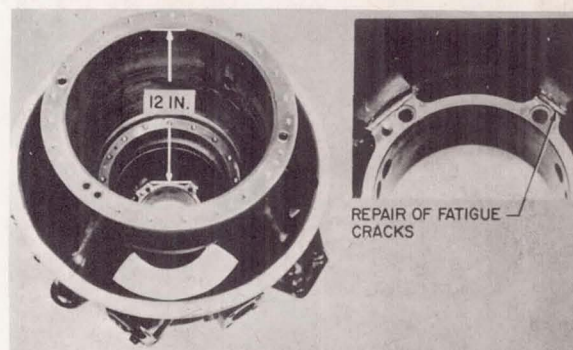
Magnesium turbine shaft seal. Electron-beam welding. (Courtesy Hamilton Standard Div., United Aircraft Corp.)
